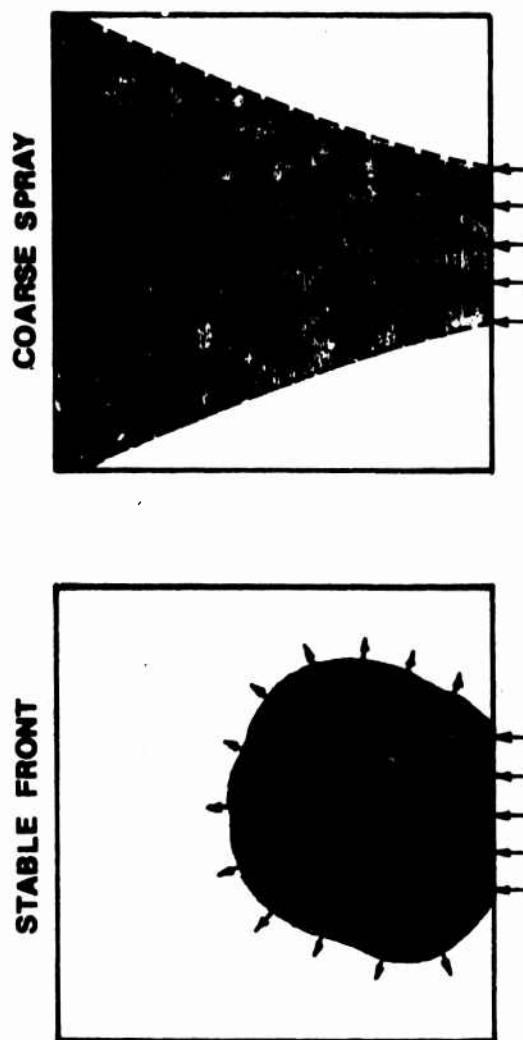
Die filling patterns observed in the transparent casting machine. Left: solid front fill during the casting of a high viscosity liquid. Right: coarse spray during the casting of a low viscosity liquid.
